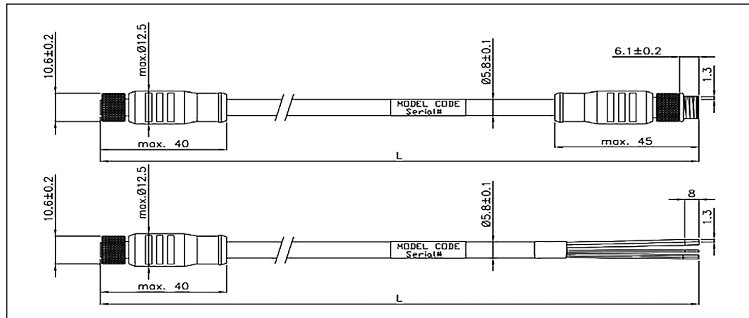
Suffix -CN and suffix -WP dimensional drawing
